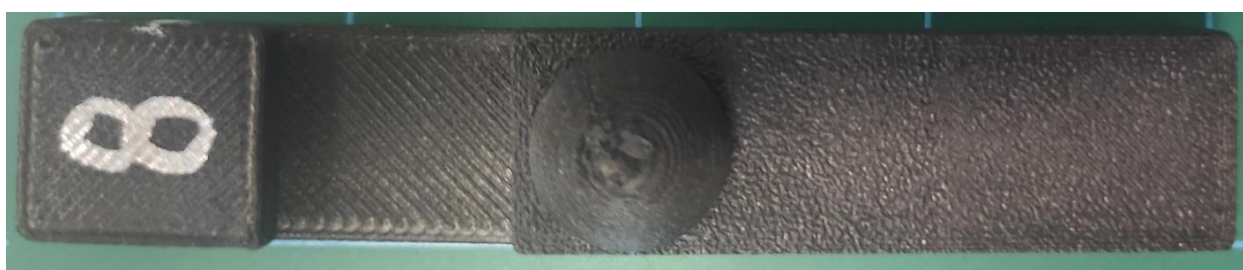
Tensile test specimen for testing the strength of rivet joint.
